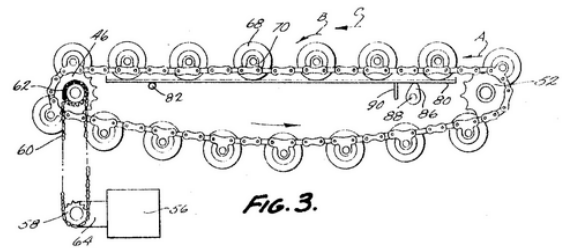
The driver mechanism consisting of wheels mounted on a chain [7].
